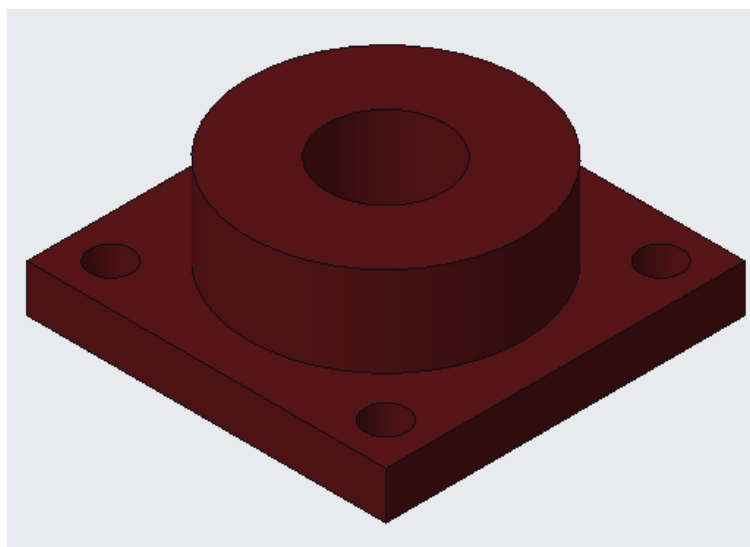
CREO representation of the 4-bolt flange 45mm internal diameter bearing
